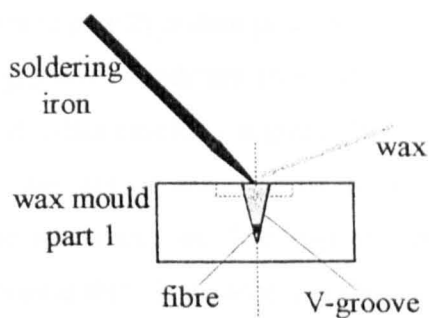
Soldering of the optical fibre on the wax mould.
